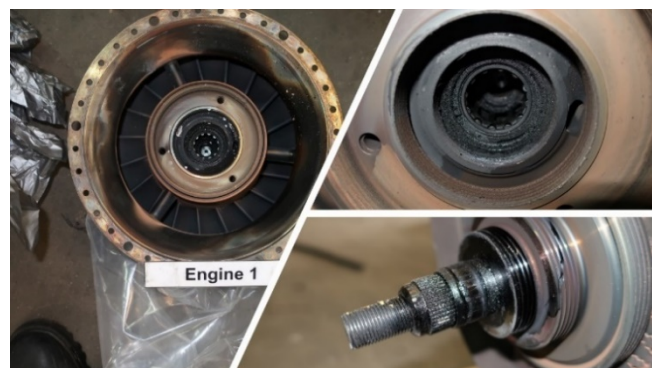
NO. 1 ENGINE BLACK COKE-LIKE BUILDUP ON GAS GENERATOR REAR BEARING AREA
